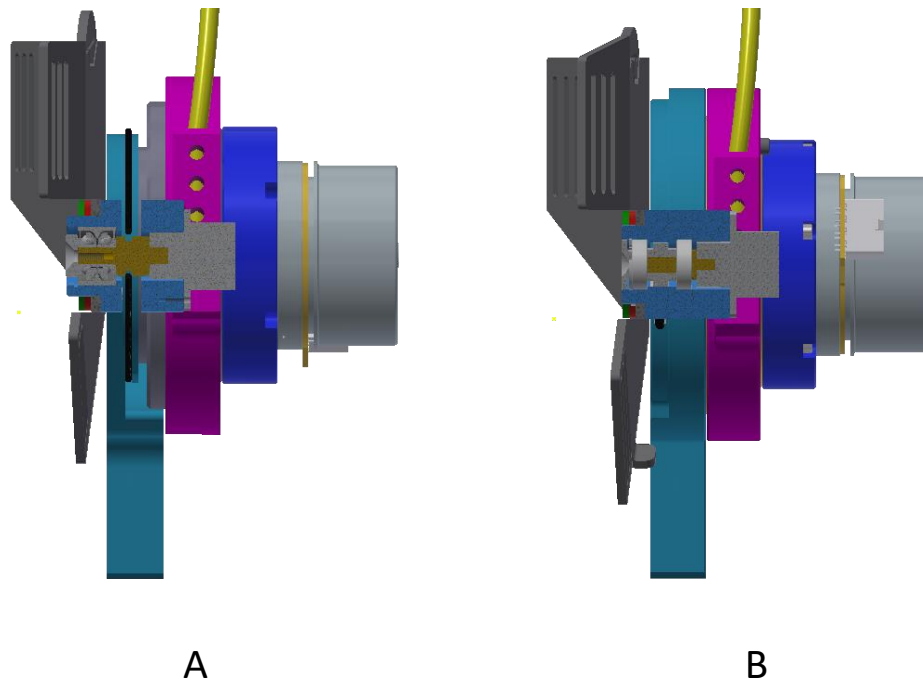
Semi-section view of the two solutions for the encoder integration: one double row deep groove ball bearing (A), two single row deep groove ball bearings (B).
